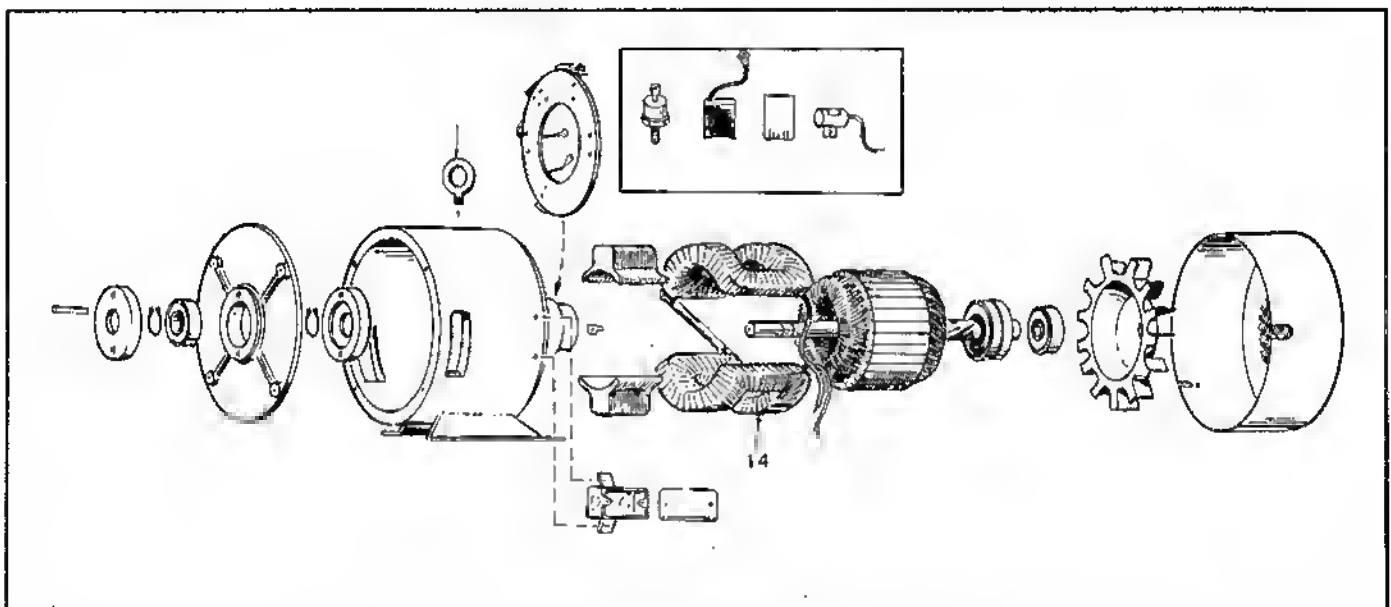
GENERATOR ASSEMBLY (SPEC J AND LATER)
